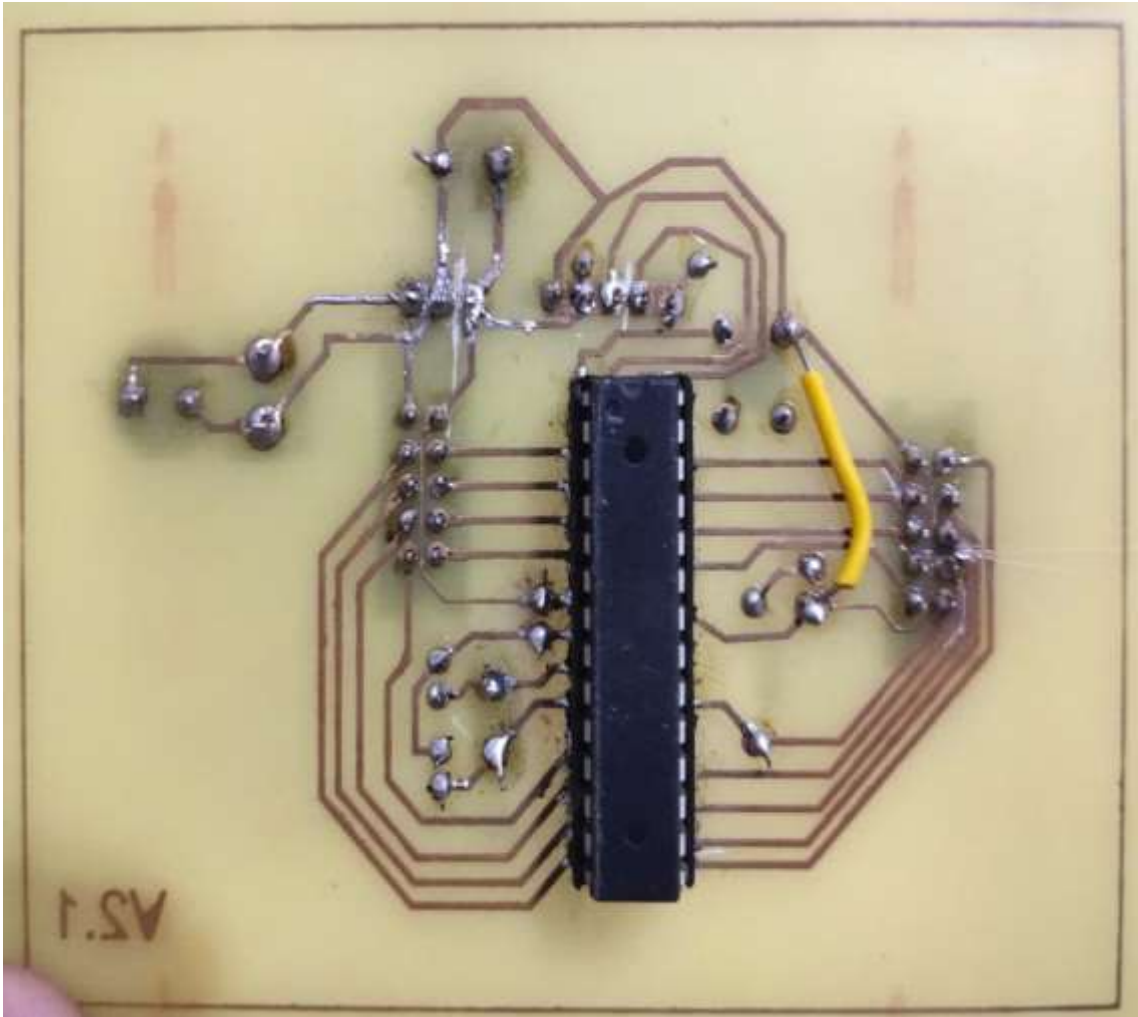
PCB of Motor controller Iteration 2 (After mounting components)
